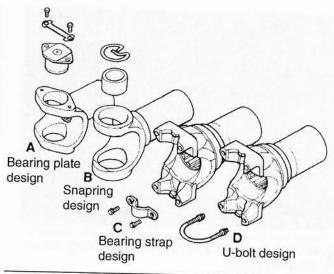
Four methods of fastening a universal joint in a yoke: (A) bearing plate; (B) snapring; (C) strap; and (D) U-bolts. (Courtesy of Spicer Universal Joint Division/Dana Corporation)
